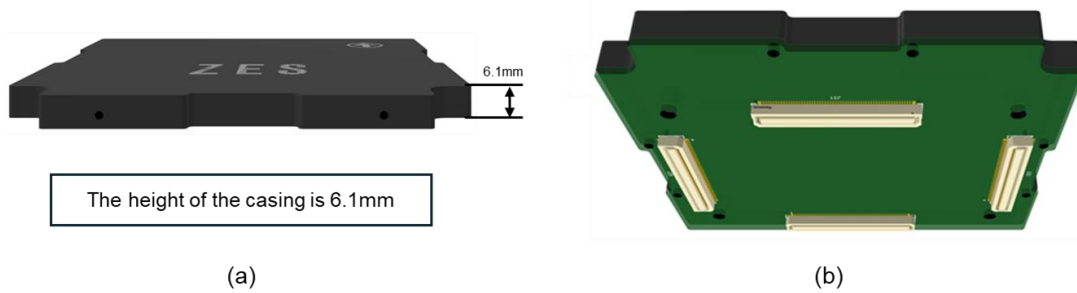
(a) Height of the casing, and (b) PCB and the casing are mated
